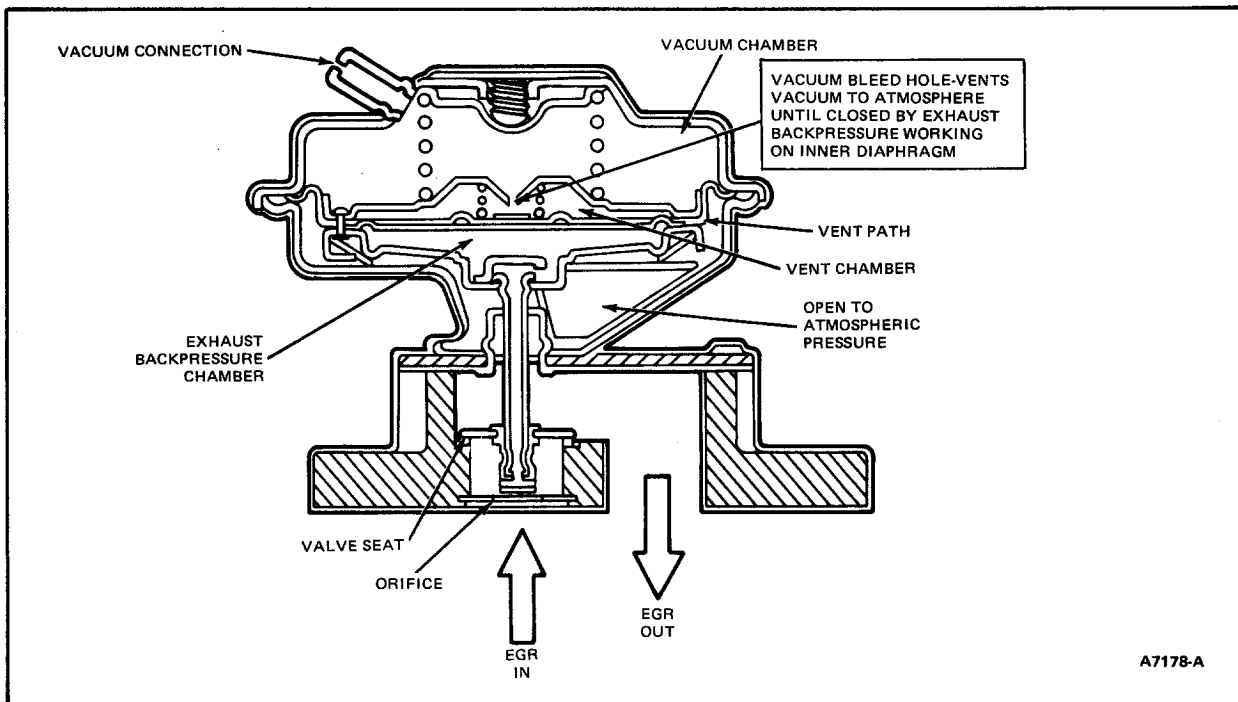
Integral Backpressure Transducer EGR Valve (9D448)
